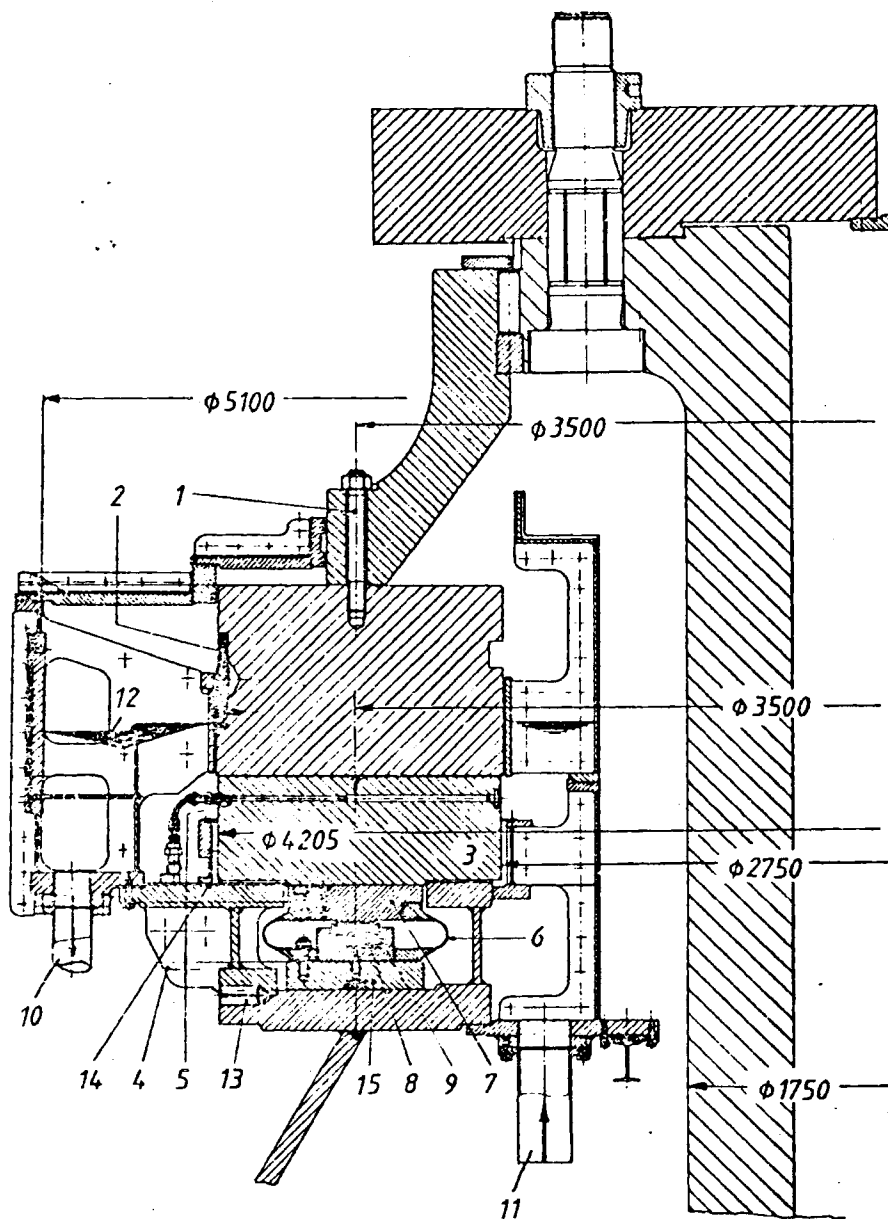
Elevation of the thrust bearing of large FT. Plant Tucuruí, Tocantín, Brazil (owner Eletronorte) built by Neyrpic. See Fig. 10.3.4. External diameter of casing 5,1, tilted pad external diameter 4,205 m, internal diameter 2,75. Shaft diameter 1,75 m. Axial thrust 2410 tons. Oil: 8,5° Engler at 50°C. Cooling water 90 m³/h. Oil volume 5,3 m³, auxiliary oil volume 4,3 m³. Tilted pad supported by a hydrostatically loaded piston 7 usually carried by pressurized oil in a toroidal axially flexible vessel 6, communicating with each other. In emergency the pad carried by the calotte 8. The toroidal vessel enables also a slight radial deflection, if the pad floats. Oil from cooler enters at the inner edge 11 of the bottom ring, is then centrifuged by the thrust collar 2 either between the pads directly, or through the lubricating gap into the outer part of the case. 1 Fastening of the thrust collar 2, 3 tilted pad, 4 joint, 5 oil injection for jacking at start up, 6 toroidal shell, 7 upper support disk of the pad, 8 calotte, 9 bottom support disk of the pad, 10 oil exit to the cooler, 11 oil inlet from the cooler, 12 oil level, 13 radial splint, 14 guide cage for the pad, 15 bottom plate of the pad with a pipe for pressurized oil from a balancing chamber. (Drawing courtesy Neyrpic, Grenoble, France).
